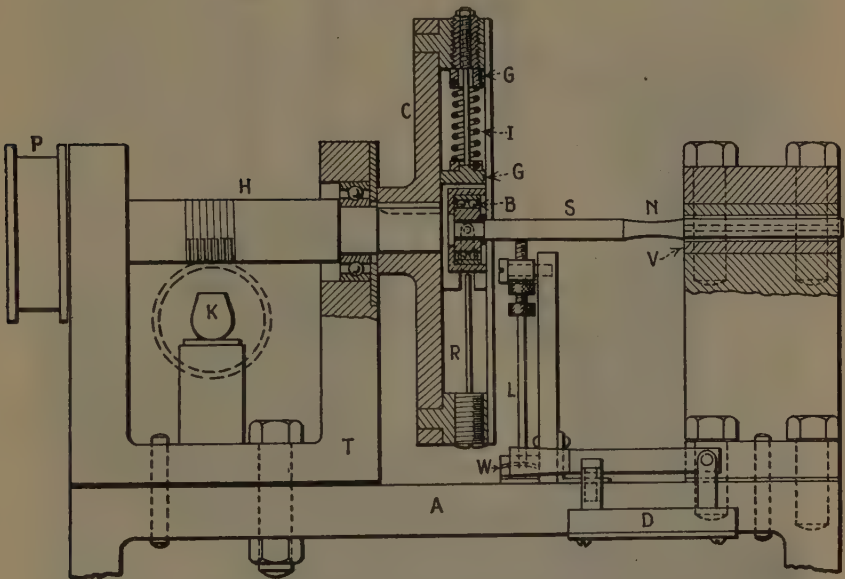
DIAGRAM OF ROTATING-SPRING REVERSED-BENDING TESTING MACHINE USED BY MOORE
